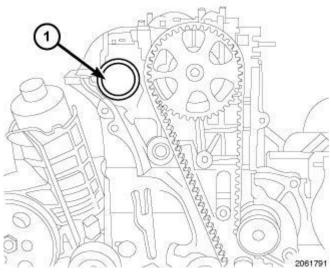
EXHAUST CAMSHAFT OIL SEAL Courtesy of CHRYSLER LLC
